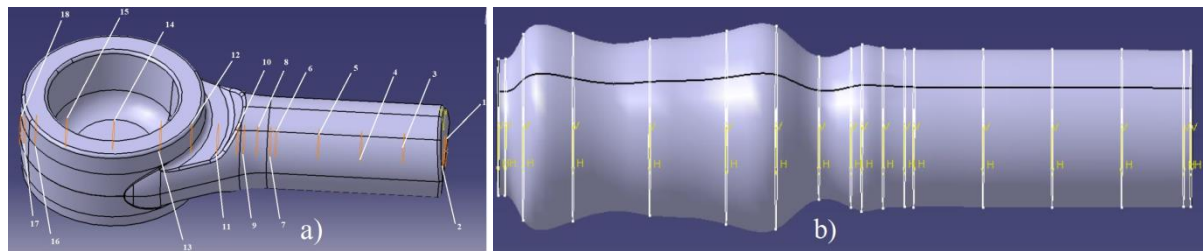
CAD models of forging a) and reduced forging, b) with characteristic sections
